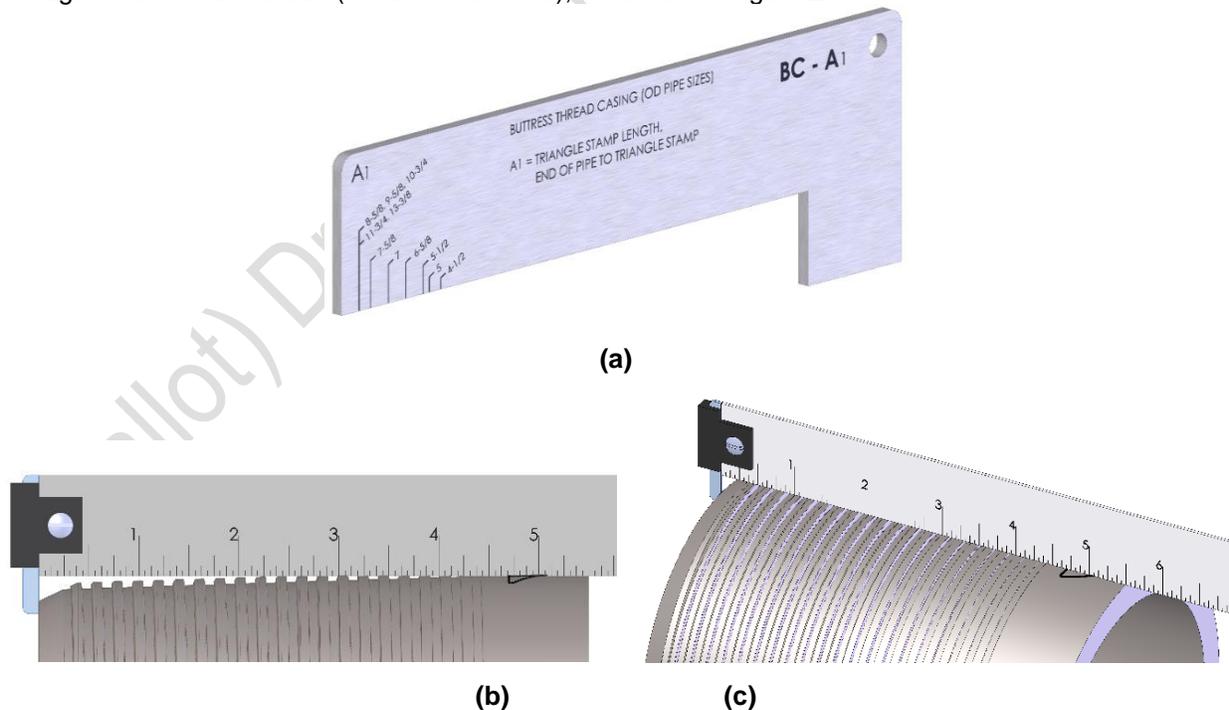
Make-up Triangle Measurement Parallel to Thread Axis
